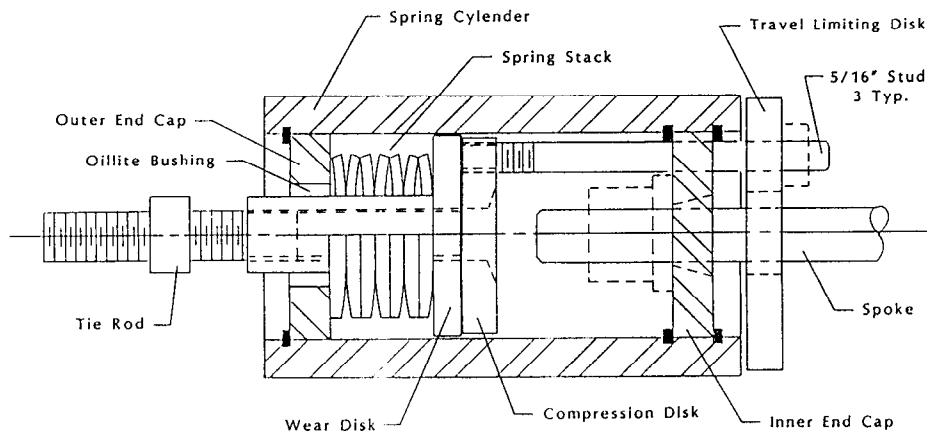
Detailed Cross Section of Rear Spoke Spring Assembly.
